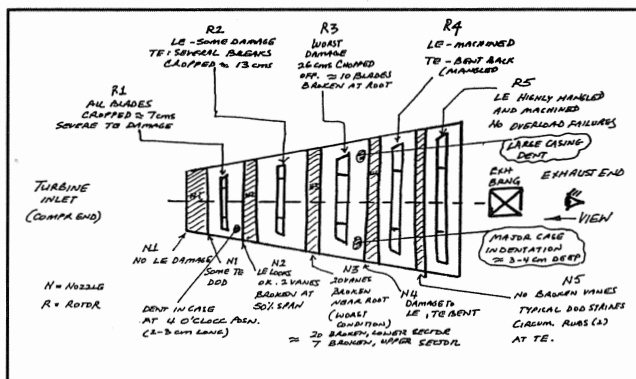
Field Sketch Detailing Damage. (Sketches, such as these made in the field, are a rapid way of documenting damage.)
